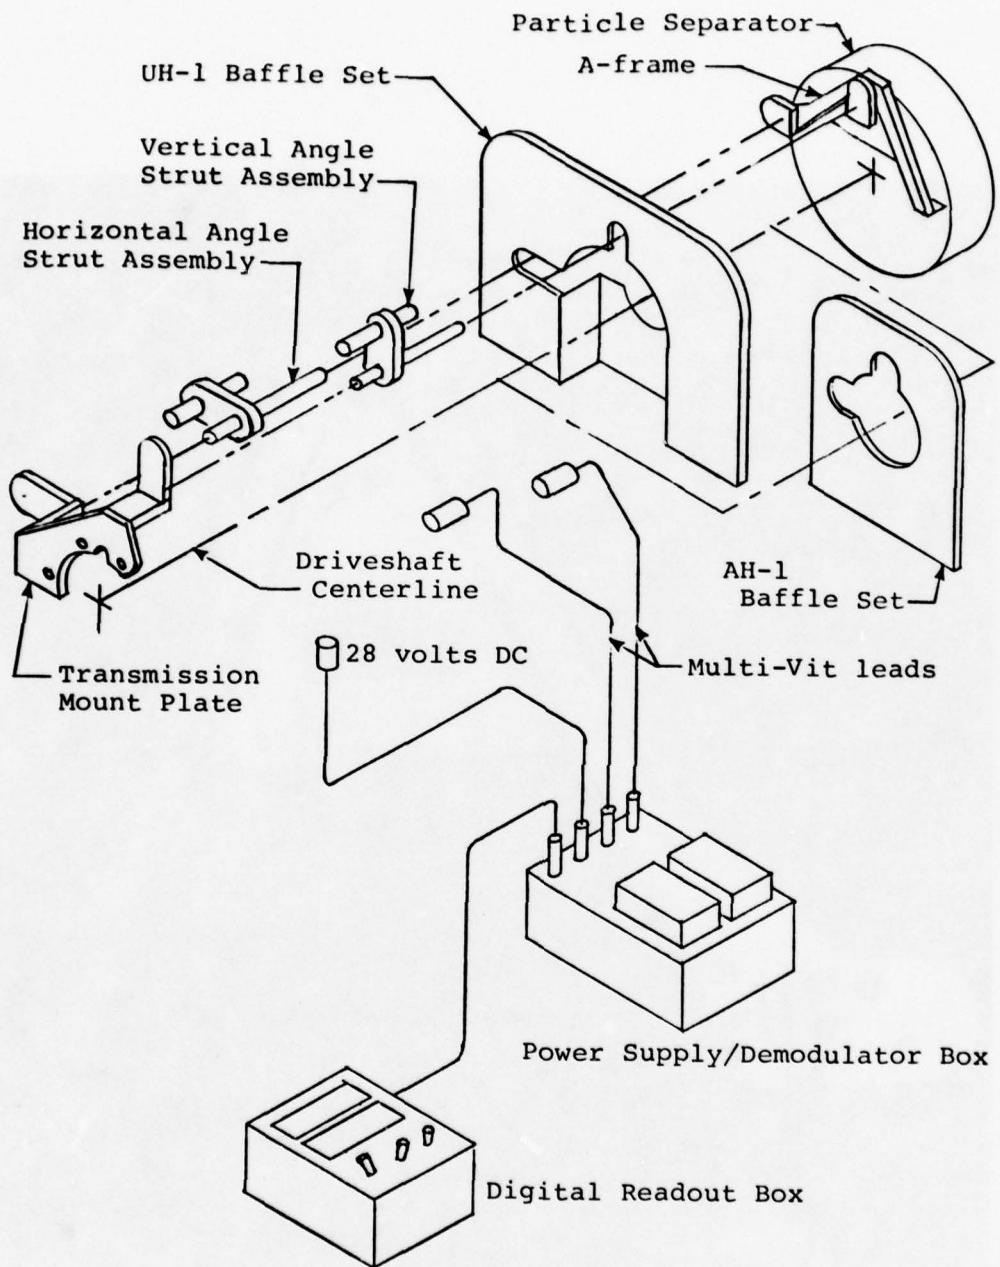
Driveshaft Alignment Indicator Installation - Schematic.
